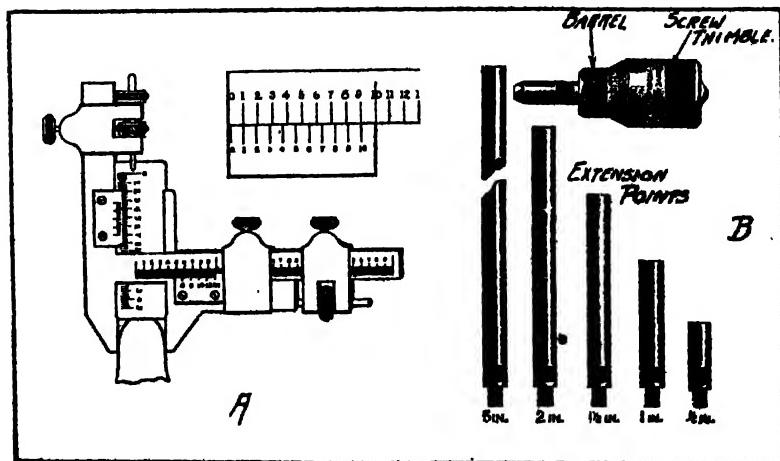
At Left, Special Form of Vernier Caliper for Measuring Gear Teeth; at Right, Micrometer for Accurate Internal Measurements.
